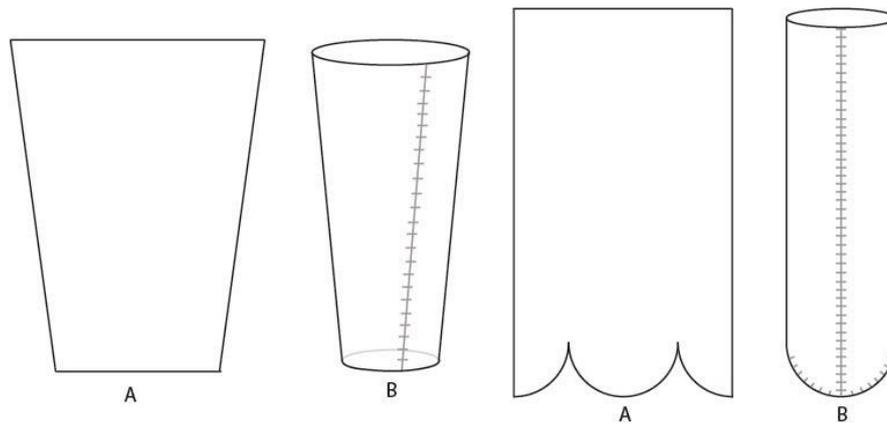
Illustrative examples of simple flatbed designs where drawings marked (A) represent the knitted pattern pieces and drawings marked (B) represent the stitched garments
